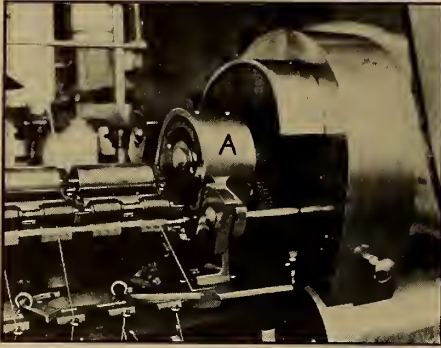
GEAR GUARDS, WITH CARRIER WHEEL IN A
